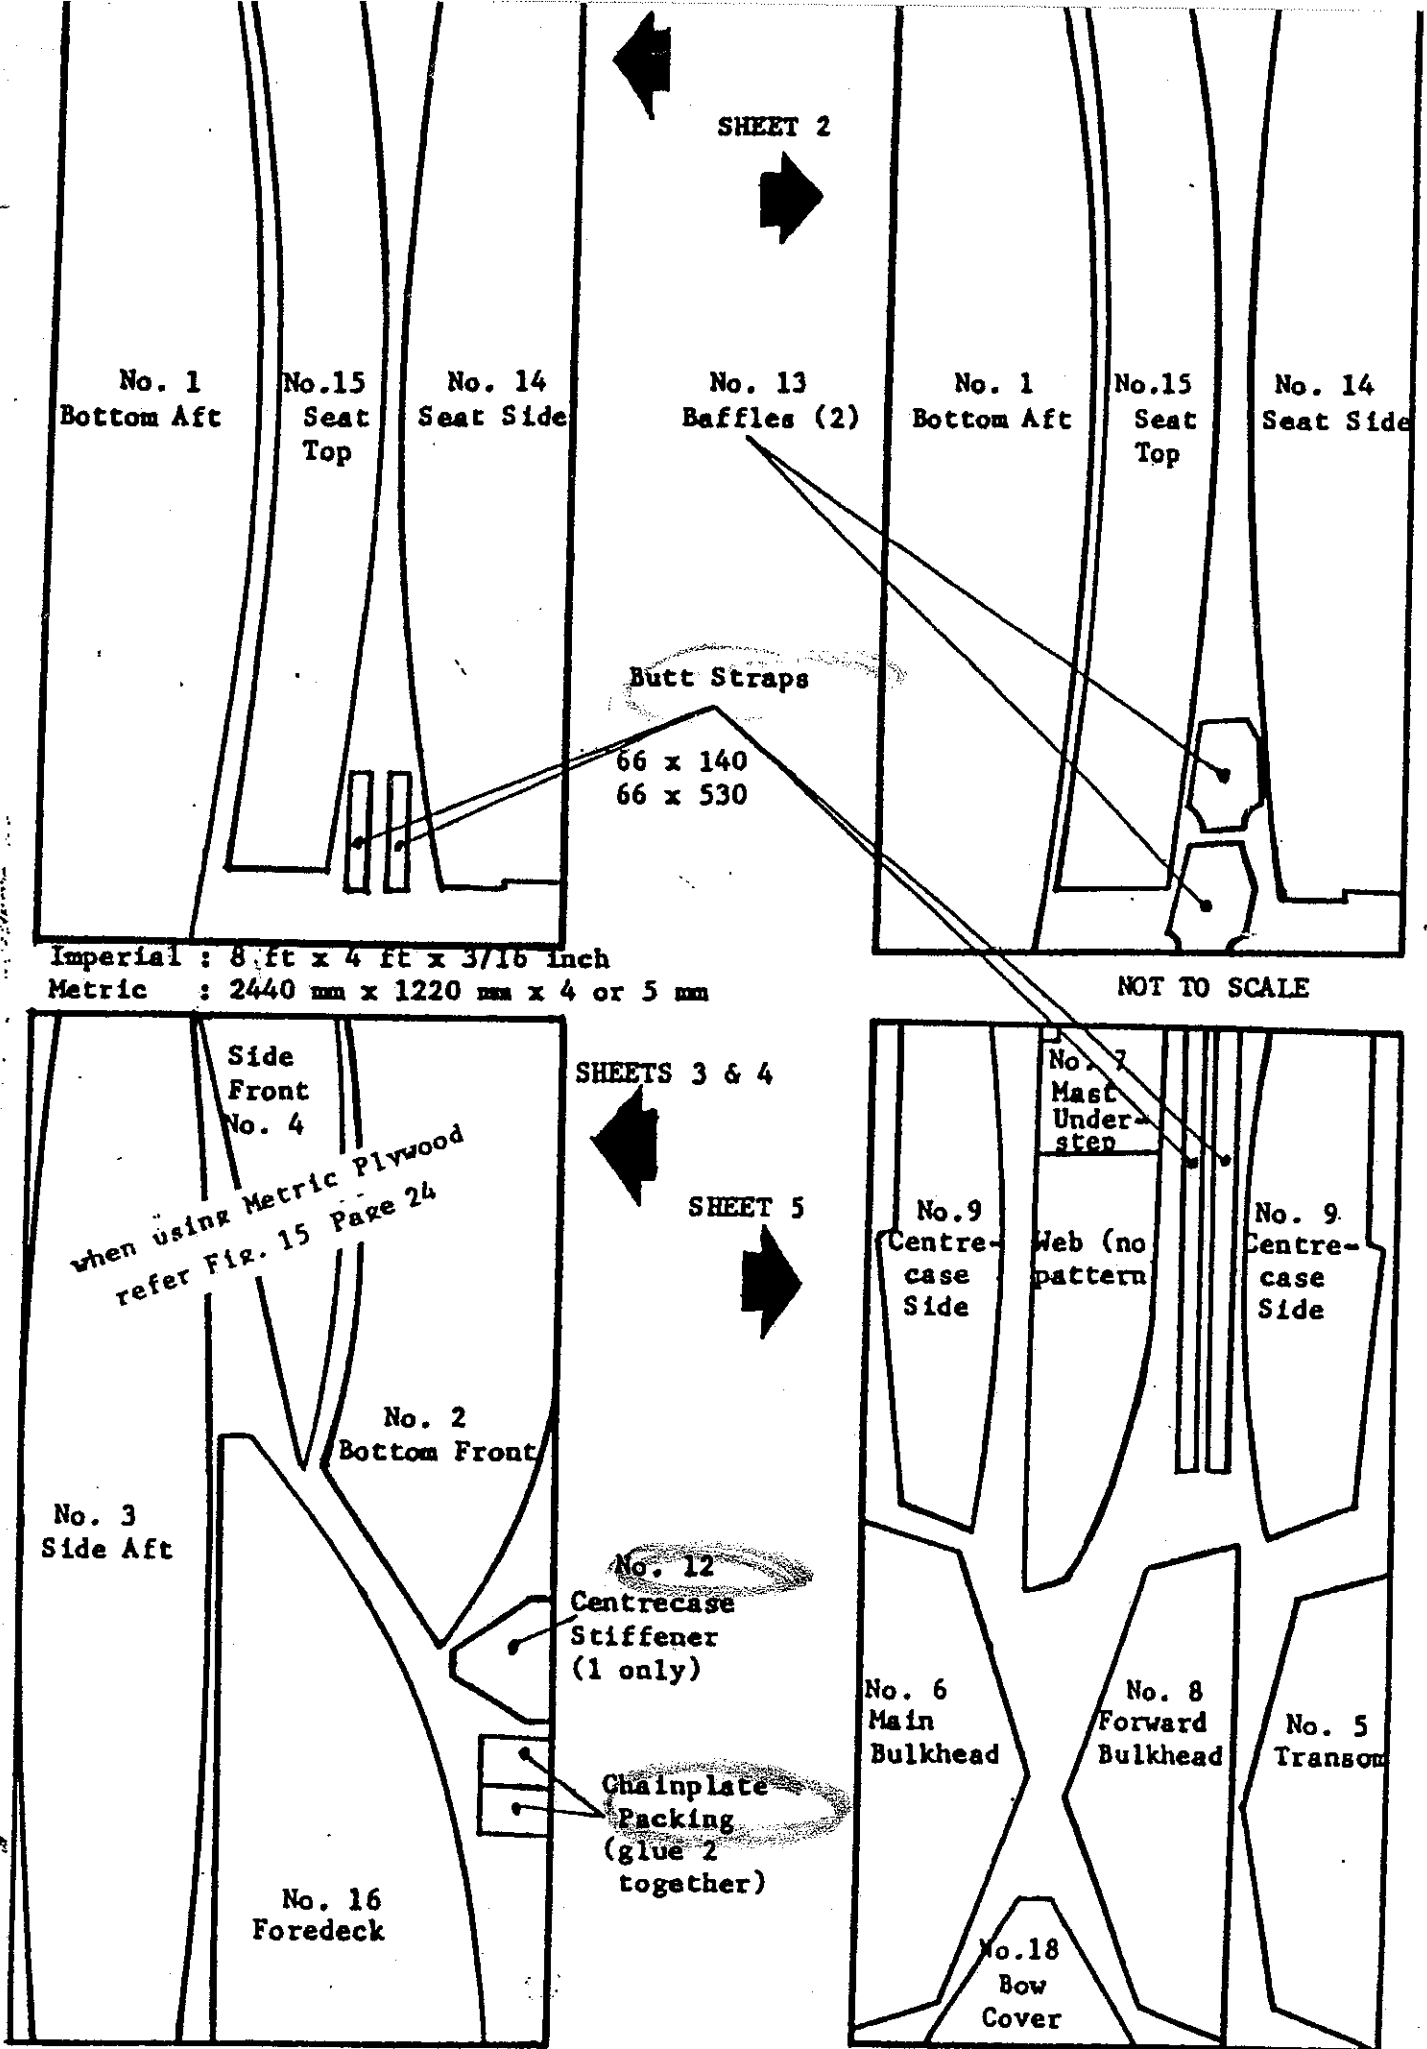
LAYOUT FOR PLYWOOD PANELS
